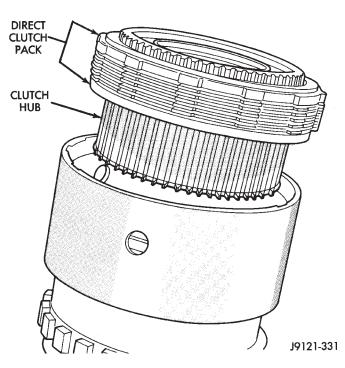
Installing Assembled Direct Clutch Pack And Hub
